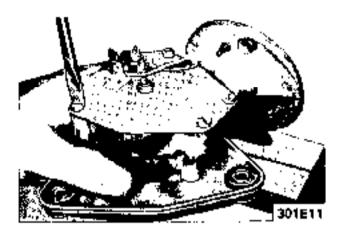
E-I 1 Remove Transmission Housing Cover Screws
